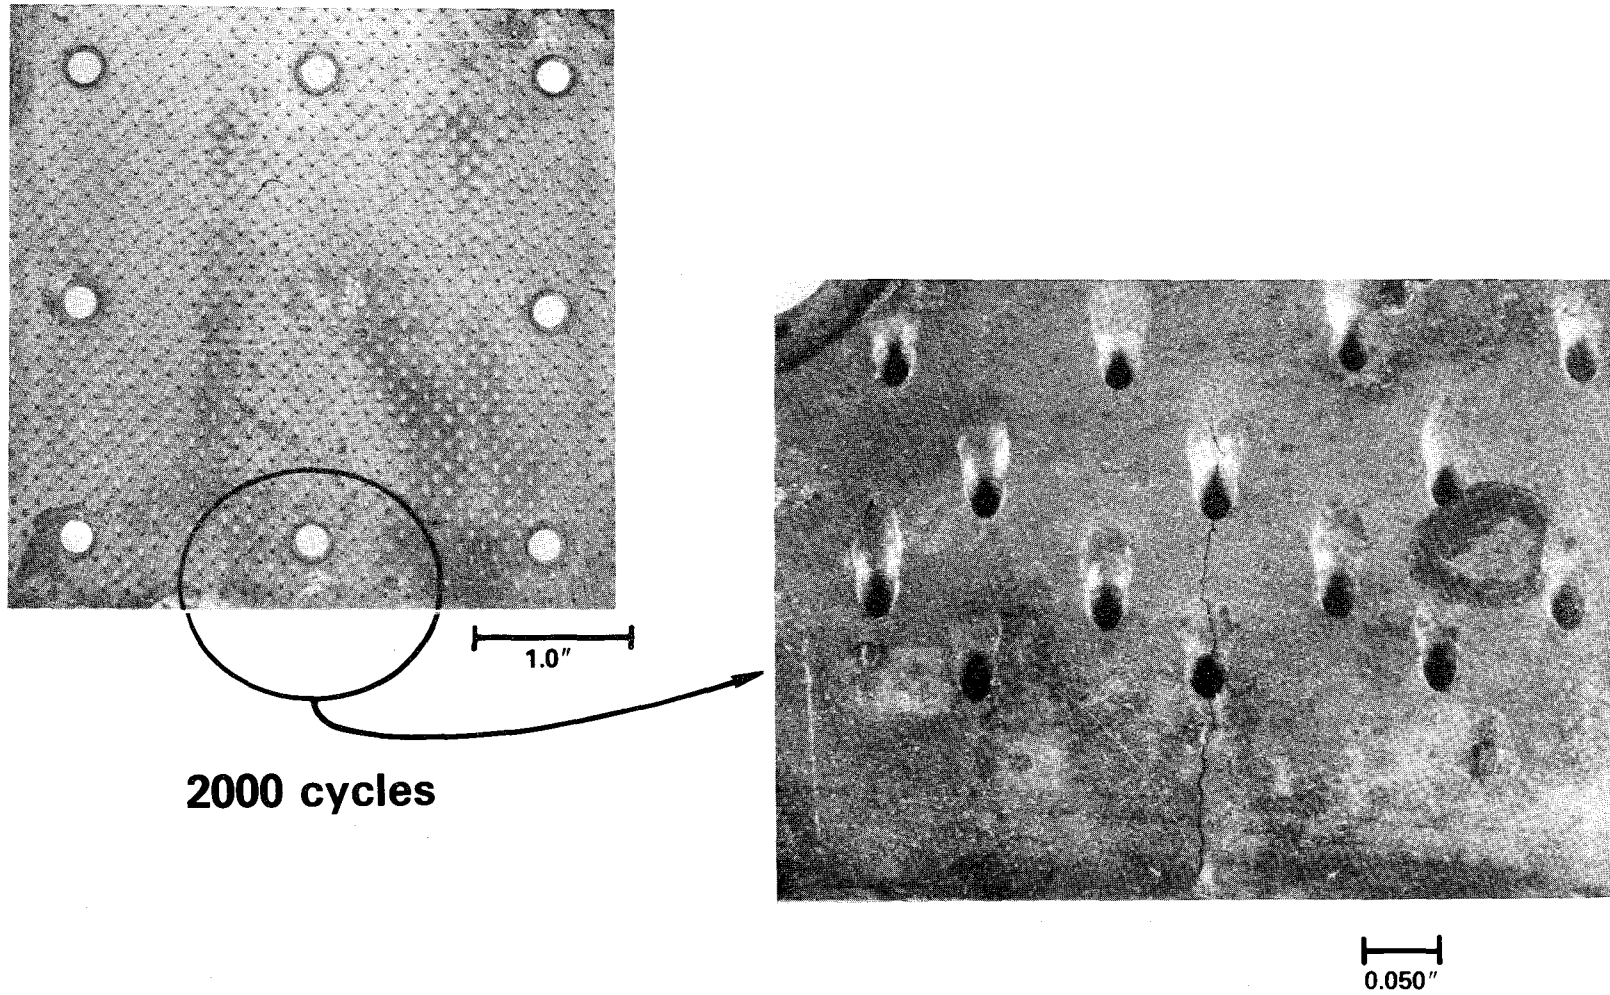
Prestressed Twin Wall Panel Tested for 2000 Thermal Cycles, Showing Link-up of Cracks Extending from Pre-cracked Laser Drilled Cooling Holes
